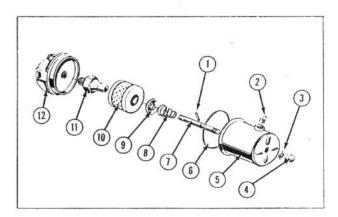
EXPLODED VIEW OF PUMP RESERVOIR -DIESEL
